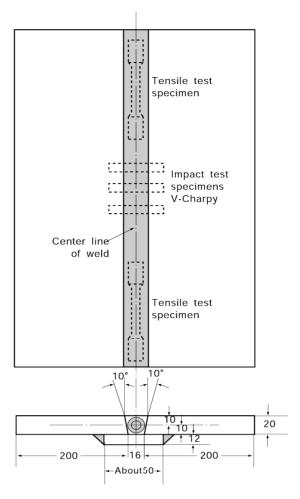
Deposited Metal Test Assembly with Multi-run Technique (Automatic Welding, Unit: mm)
